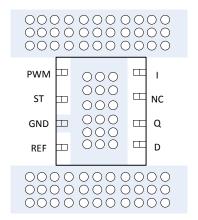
TL4242-Q1 WSON Board Layout Diagram
